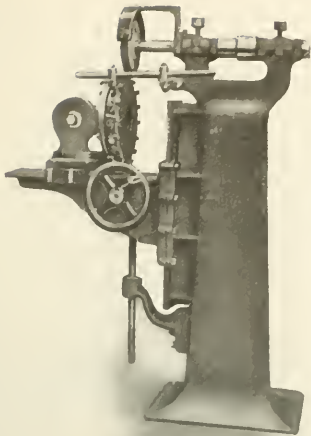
Grinding an Inserted-tooth Milling Cutter
